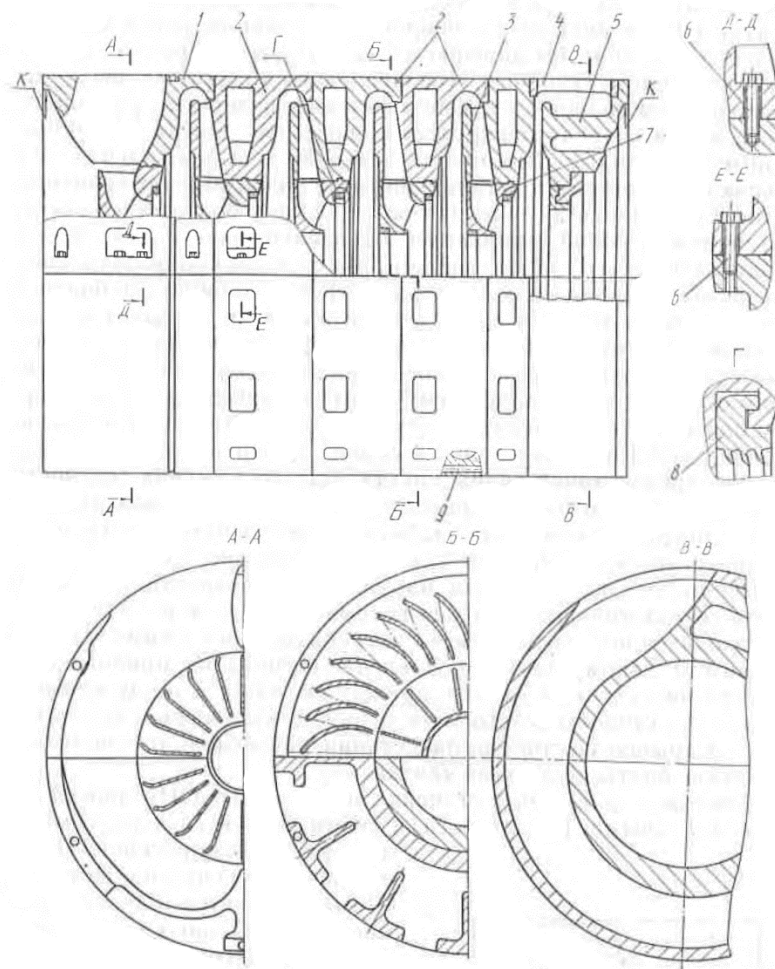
Set of compressor diaphragms with vertical connector. 1-suction chamber; 2-intermediate diaphragm; 3-internal partition with IT; 4-spacer ring; 5-end diaphragm with a snail; 6-bolts that weld the halves of the diaphragms; 7-spatula; 8-labyrinth bushing; 9-tie pins
